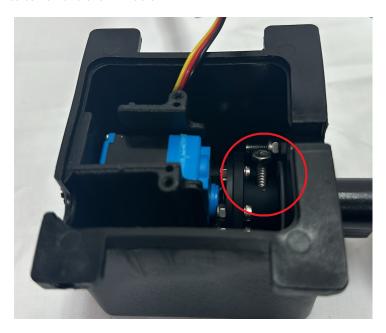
Thruster Shaft (Skid Does Not Have Servo)
